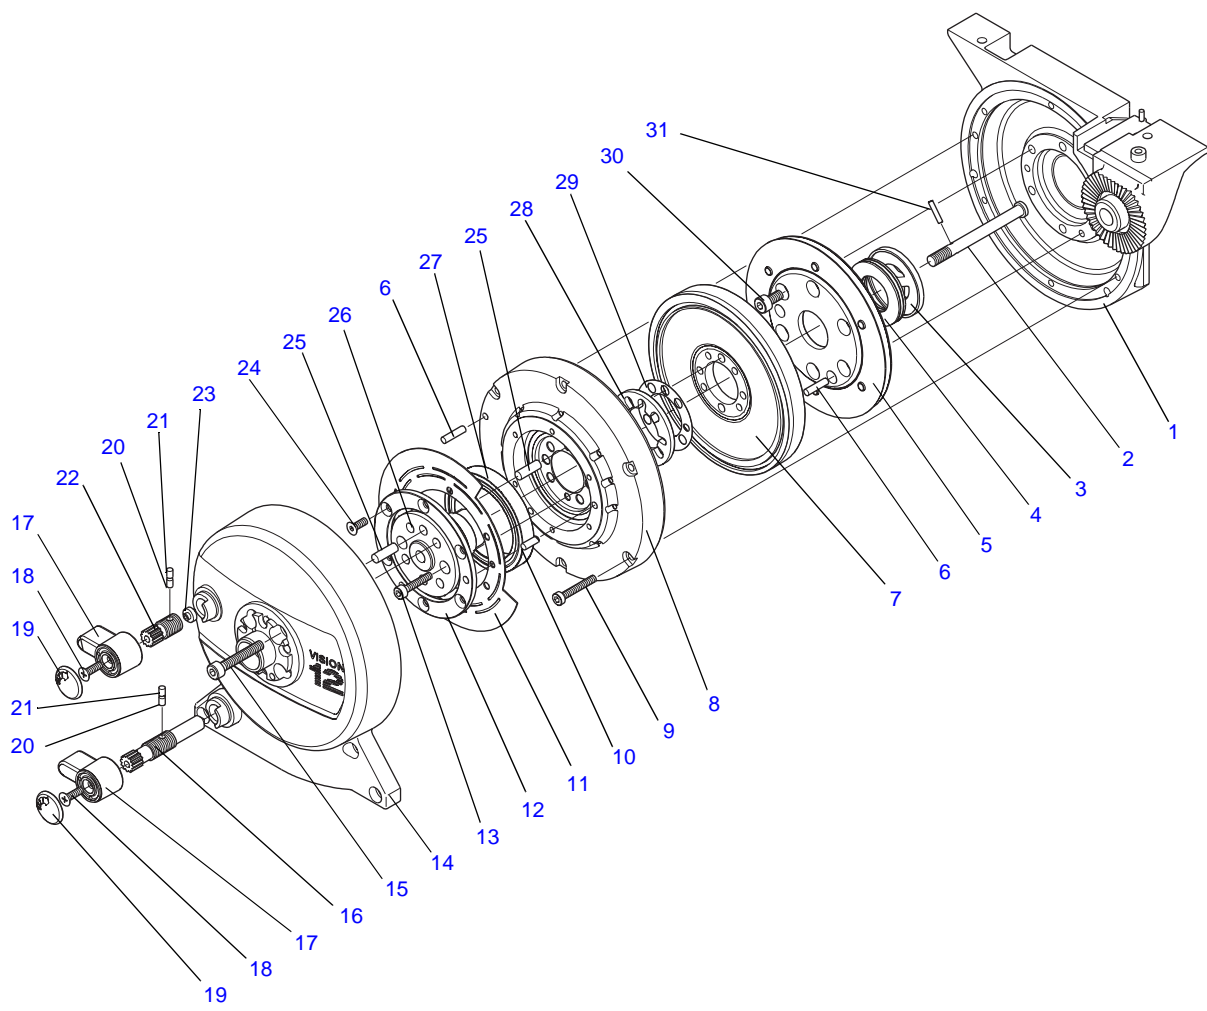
Vision SD12 Pan and Tilt Head - Pan Unit Assembly
